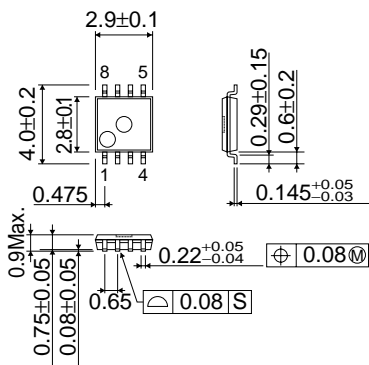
(e) PHYSICAL DIMENSION (Units : mm)
